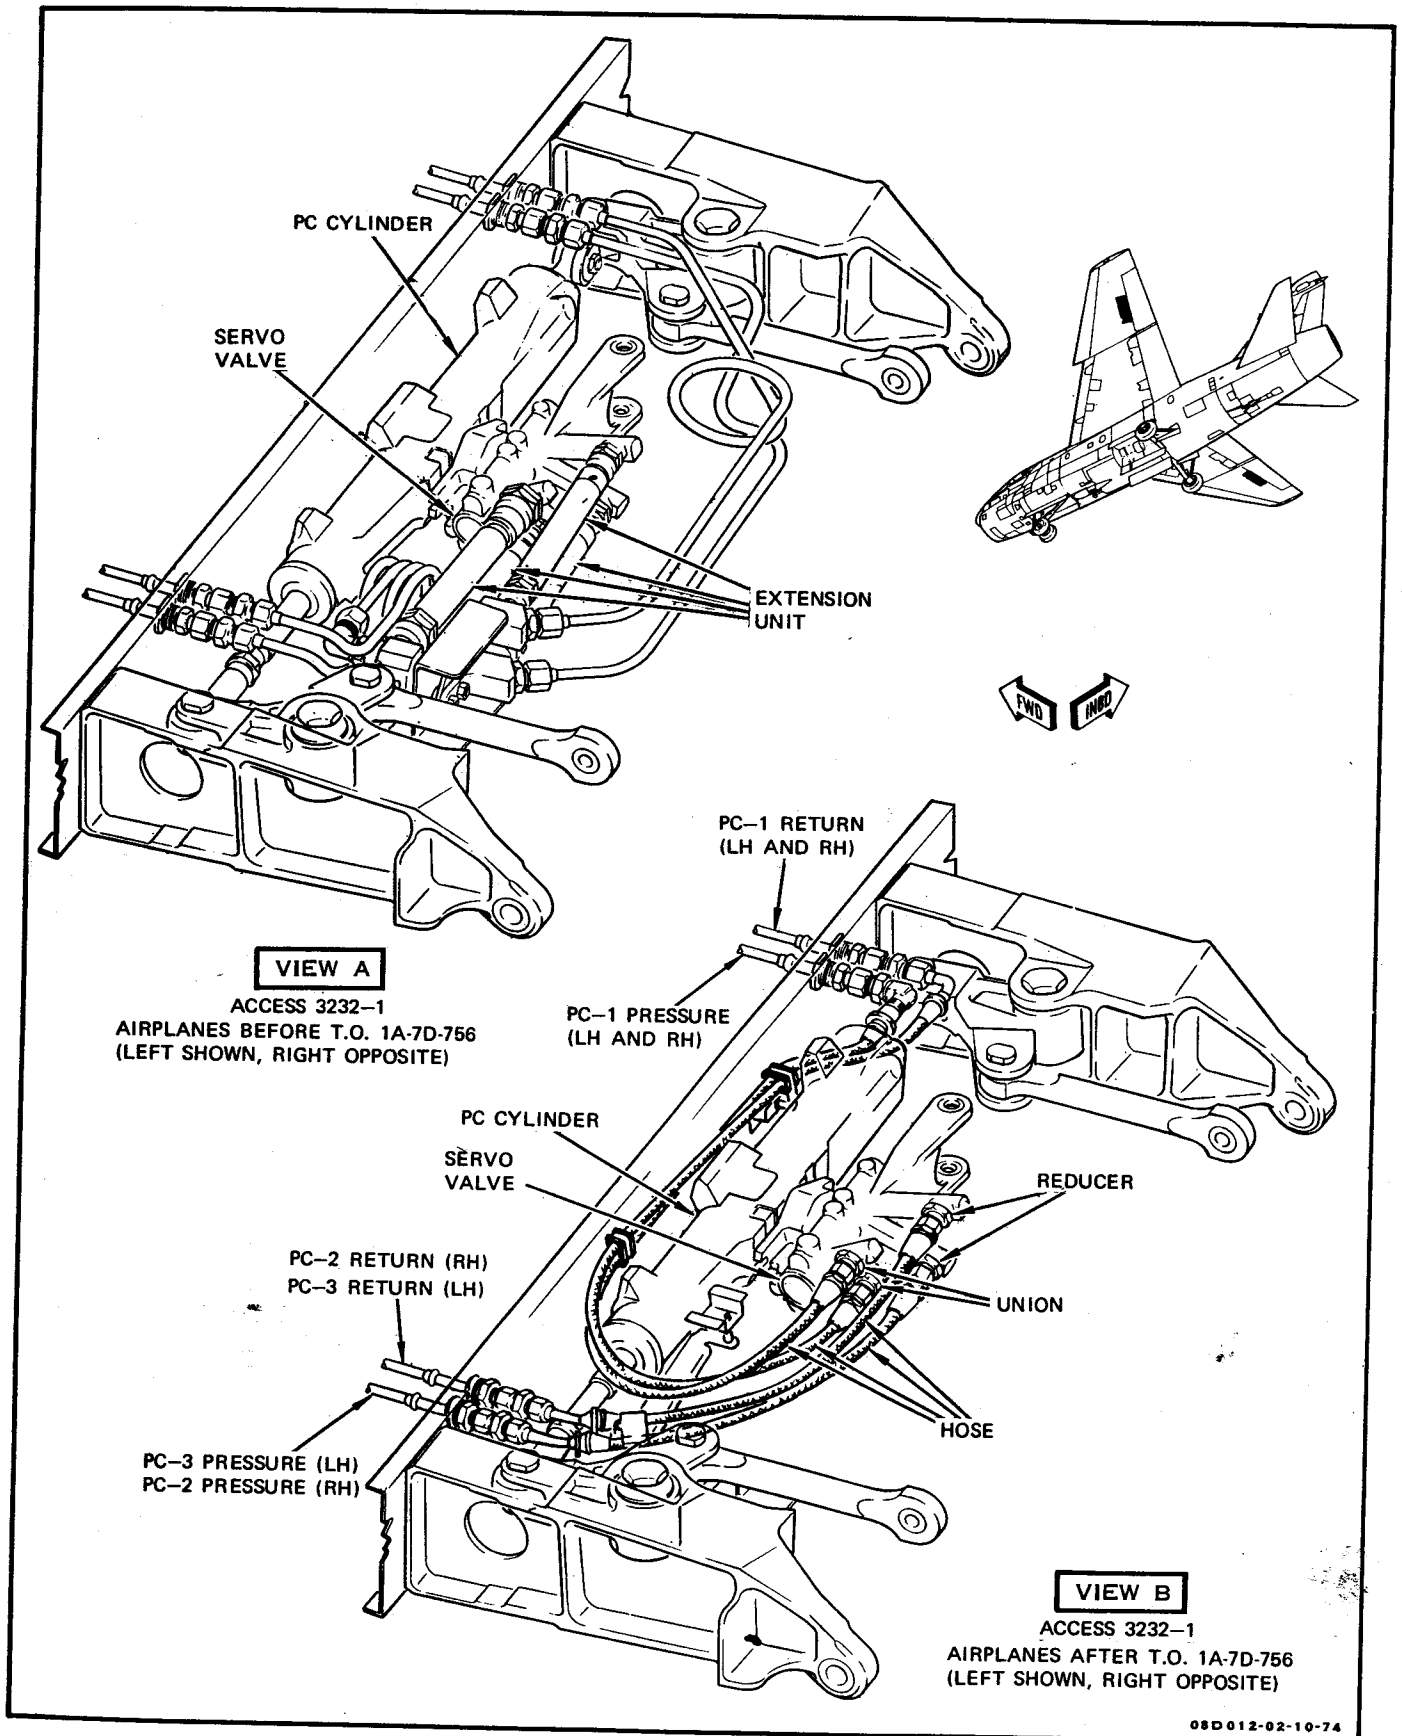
Aileron PC Cylinder Removal and Installation (Sheet 1)
